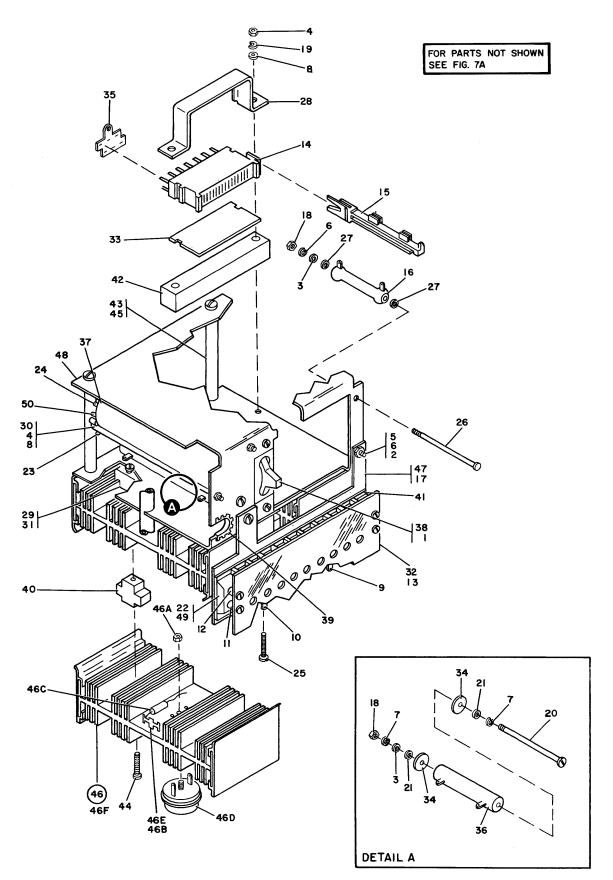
B. MID PAC POWER ASSEMBLY. SEE LIST 7B.
